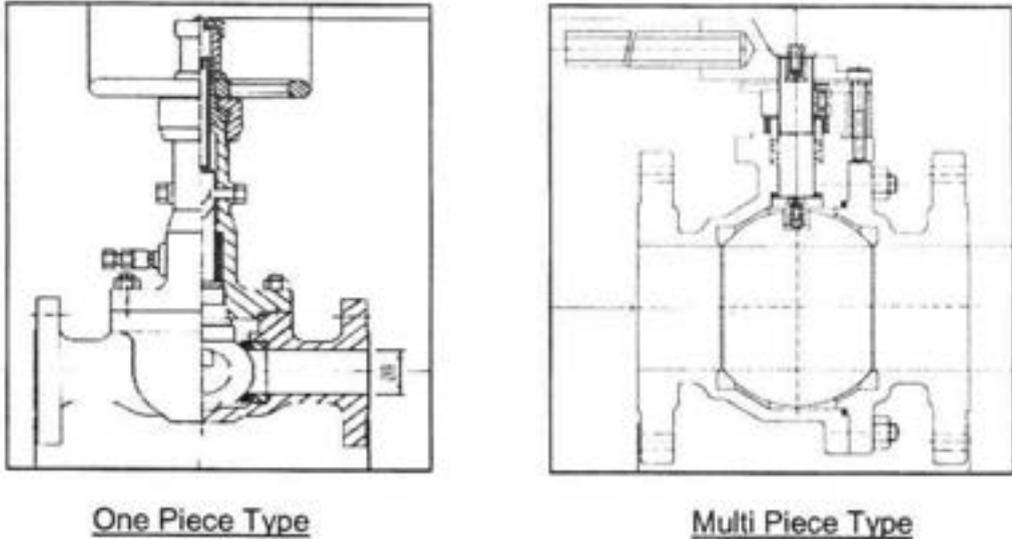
One Piece & Multi Piece Types of Ball Valve
